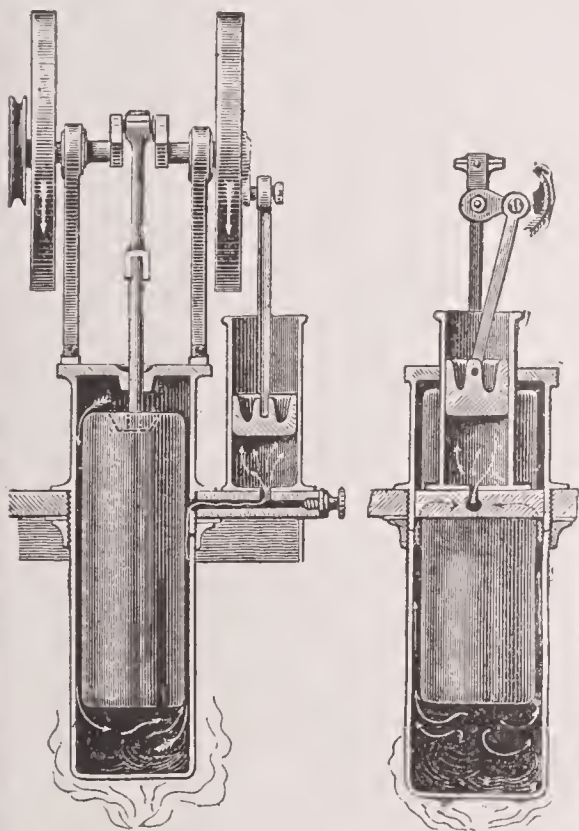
HOT-AIR ENGINE—SECTIONAL VIEW.
